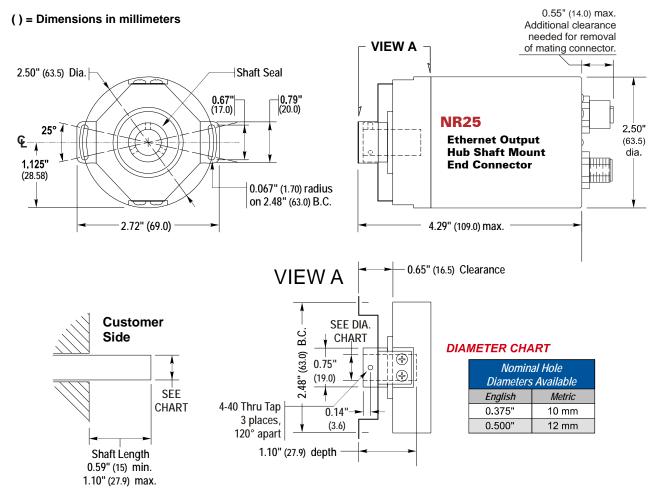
Hub Shaft Mount, End Connect Outline Drawing
